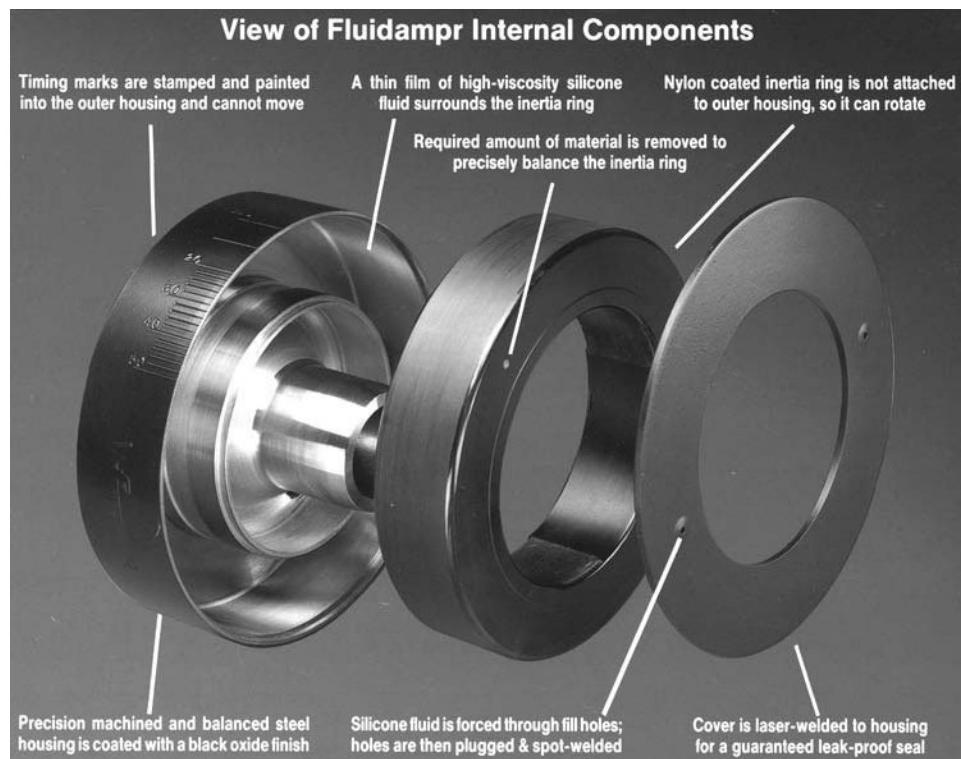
Exploded view of a viscous vibration damper. (Courtesy of Vibratech INDEX)
